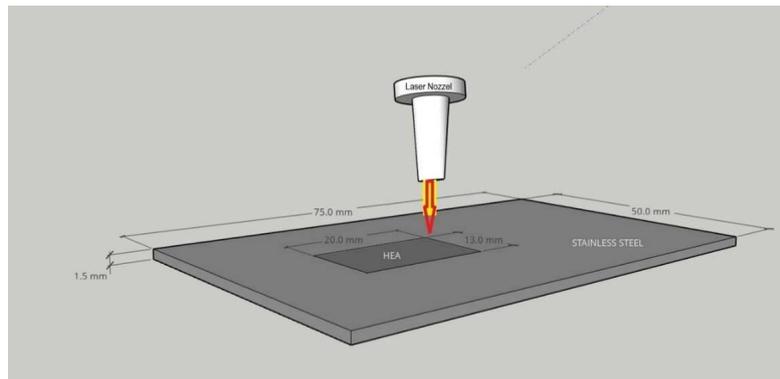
Laser Beam Welding process schematic diagram along with dimensions of samples.
